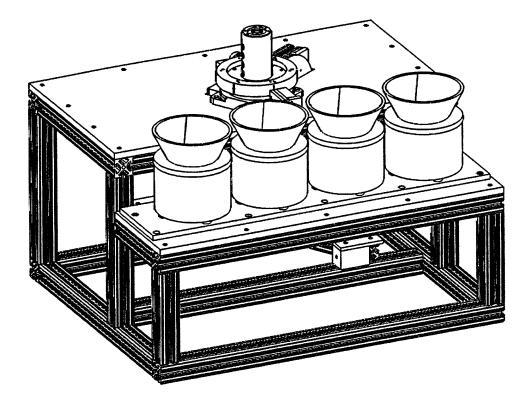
CAD drawing a the sorting system (minus the vision system) mounted on its frame
